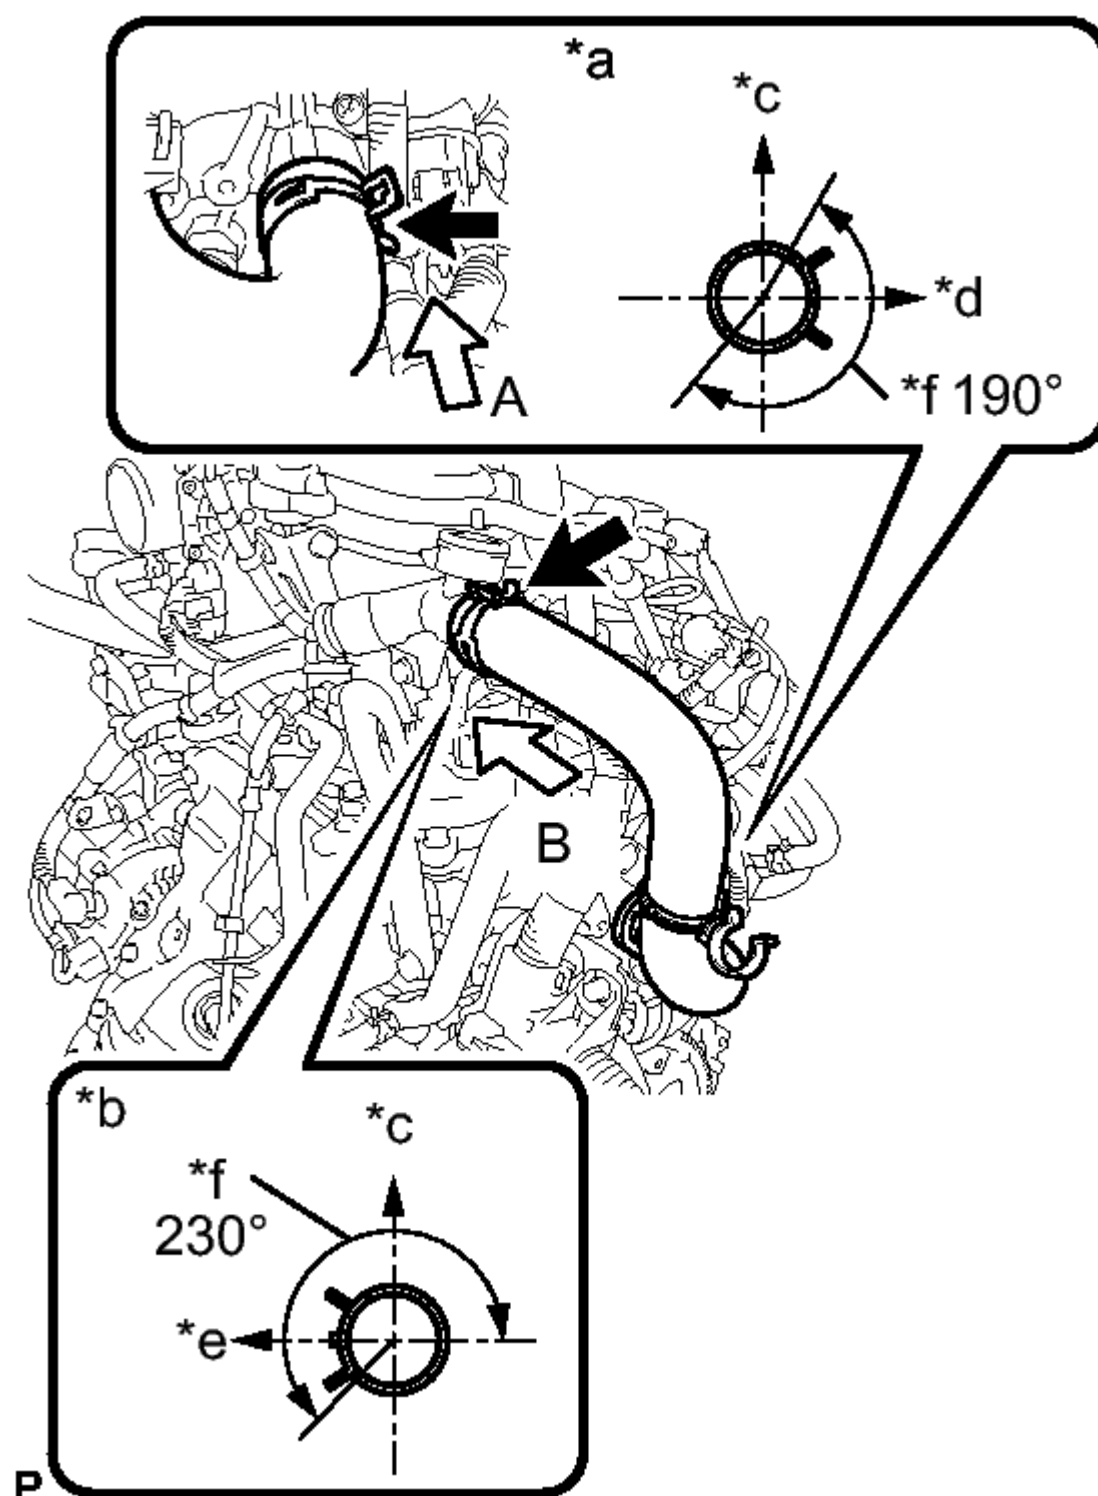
Identifying No. 1 Radiator Hose Clip Positions
